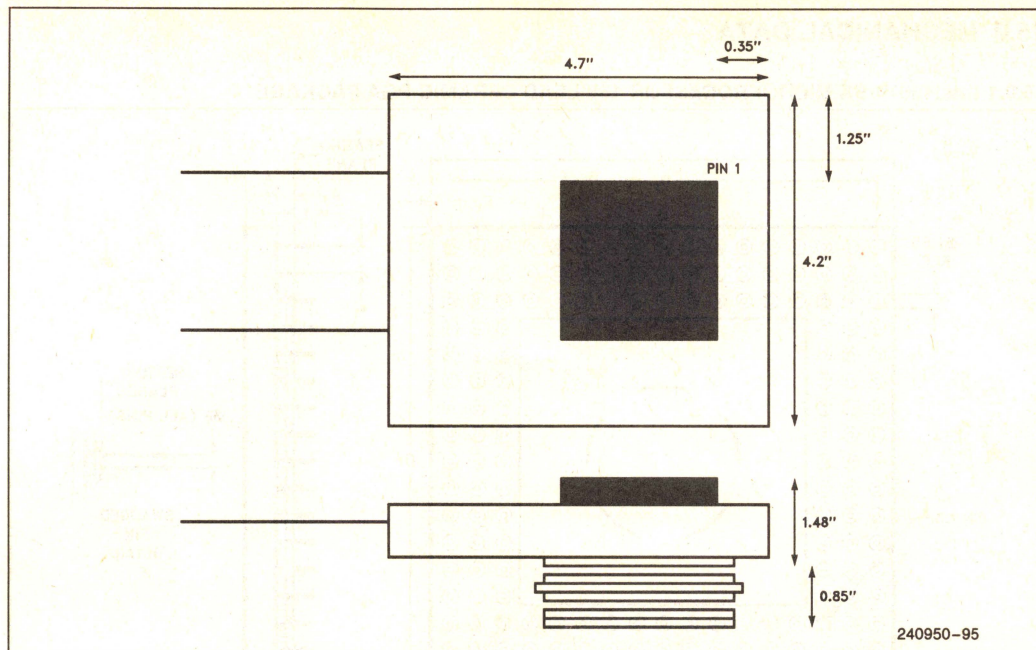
ICE-486 Probe Dimensions with ADAPT Pin Scrambler Board Installed
